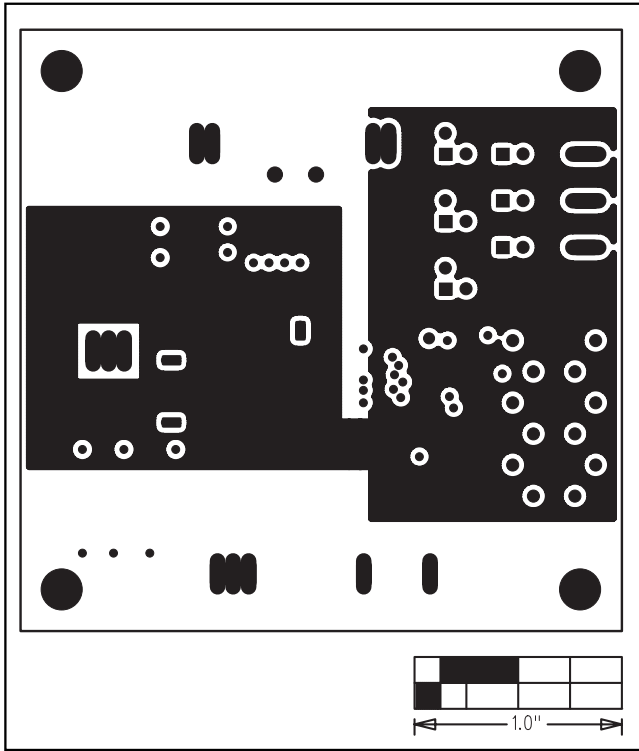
MAX8720 EV Kit PC Board Layout—Internal GND Layer
